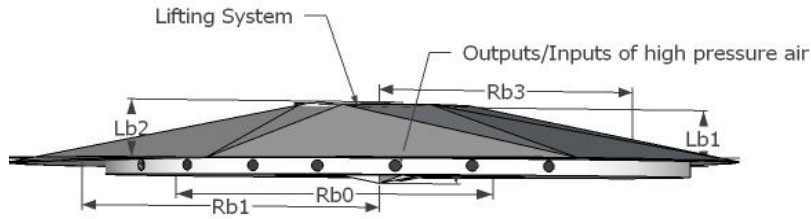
The geometric dimension of the saucer shaped body of the UFO.
